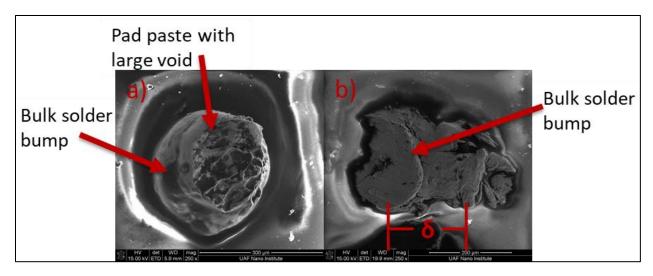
SEM Top view of (a) SAC 305 solder joint after failure when tested at 85 C. (b) SAC 305 solder joint after failure when tested at 110 C.
